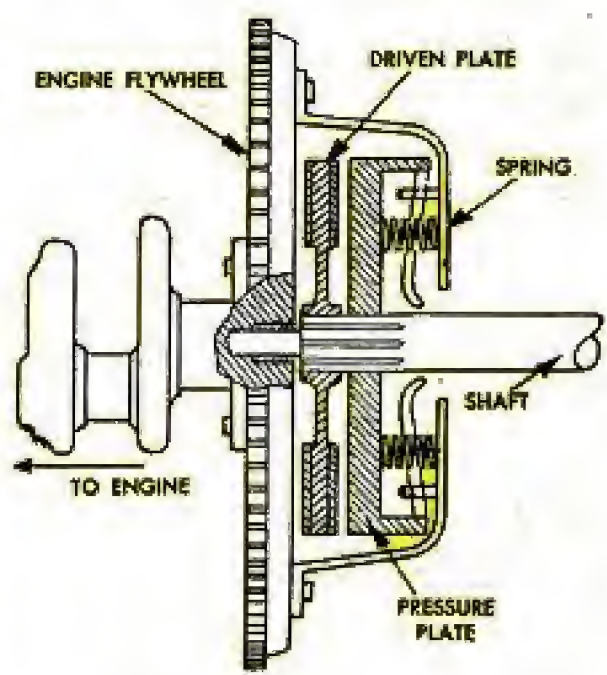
Cross section of a representative friction clutch used with a manual-shift transmission, shown in the released position. The driven plate has a friction facing on both sides and slides on the splined shaft. When the clutch is engaged, the springs in the pressure plate force it against the flywheel.
